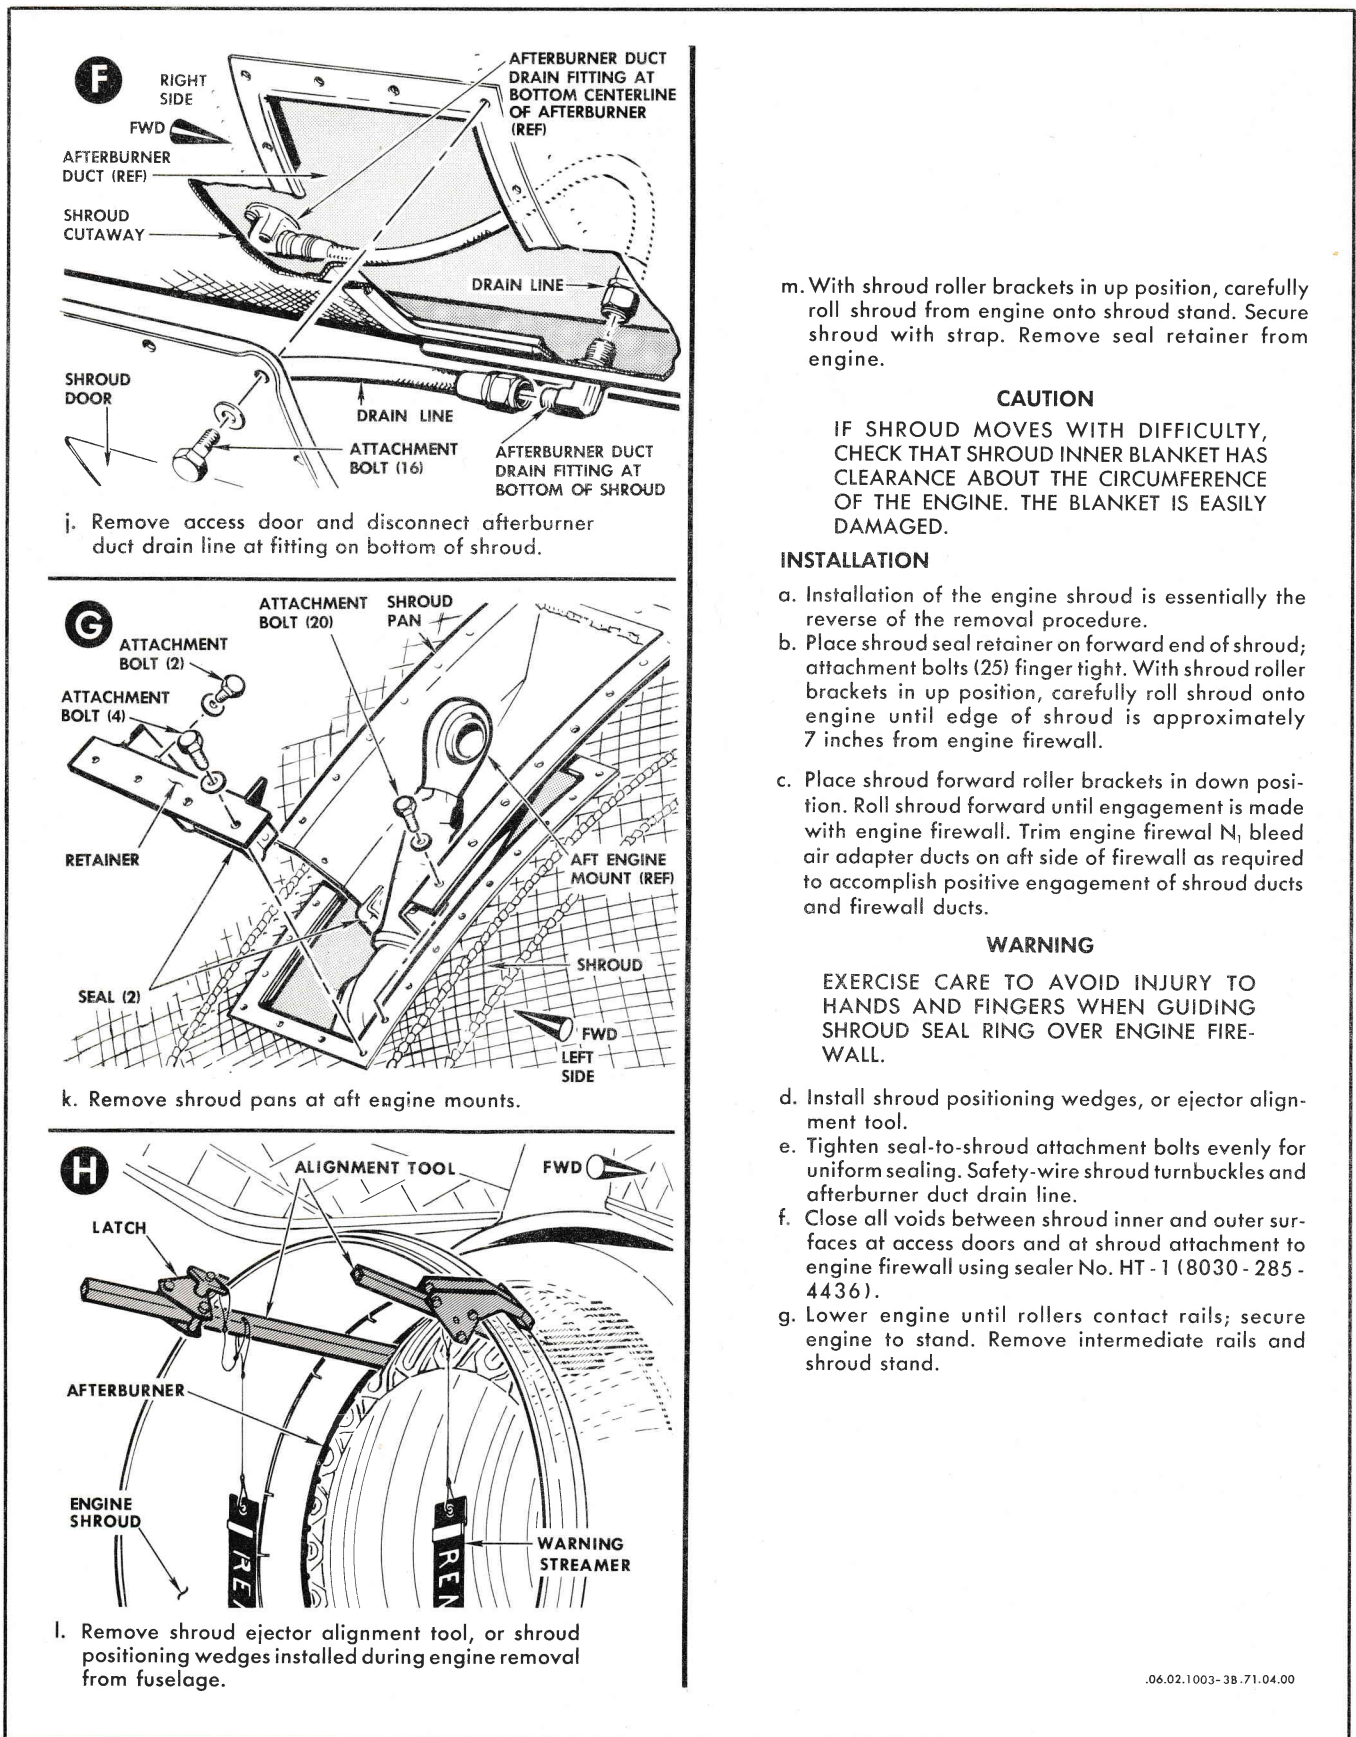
Replacement, Engine Shroud Using Stand USAF ETU-8/E (Sheet 4 of 4)
